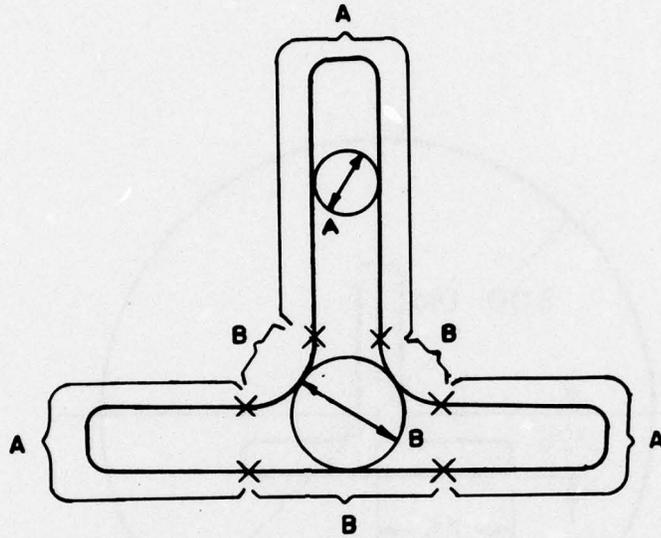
SECTION THICKNESSES AND TRANSITION POINTS USED IN THE DESIGN OF THE BEARINGS FOR FLAT-FACE "T" DIE
